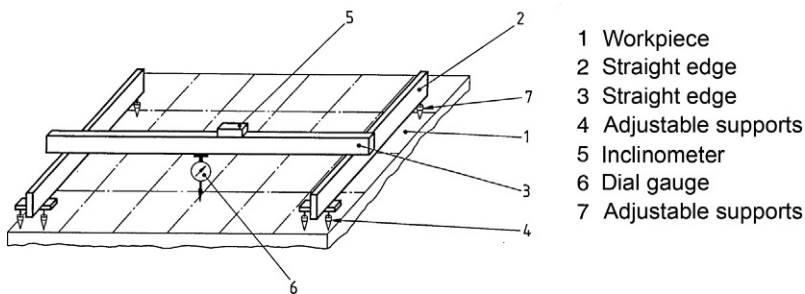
Assessment of flatness deviation of a workpiece (1), with straight-edges (2,3); adjustable supports (4); inclinometer (5); and dial gauge (6)
